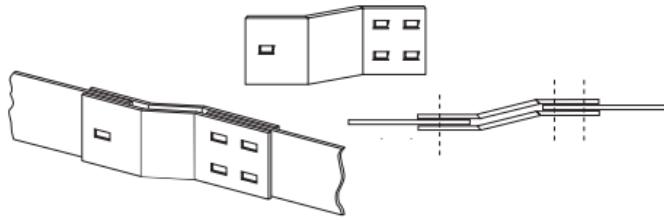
Offset Tie Plate – Four Hole to Single Hole.
